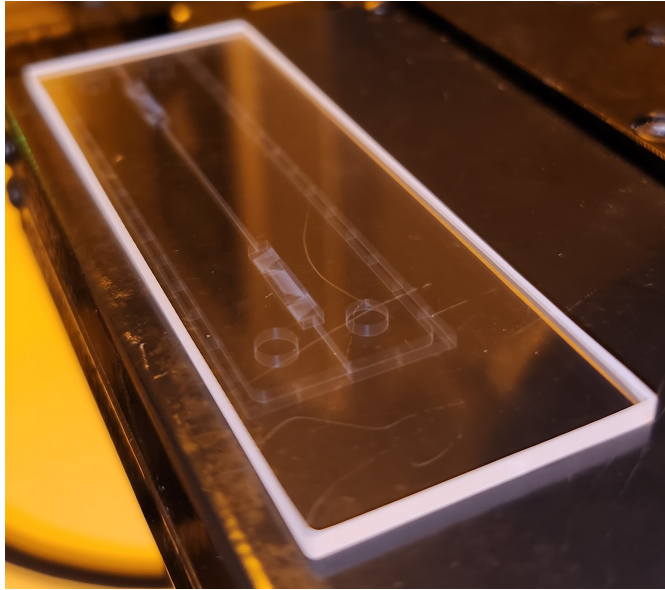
Sample example processed using the surface machining macro to manufacture oblique flexure joints using the x10 laser objective. The KOH etching failed. The oblique parts were not etched completely.
